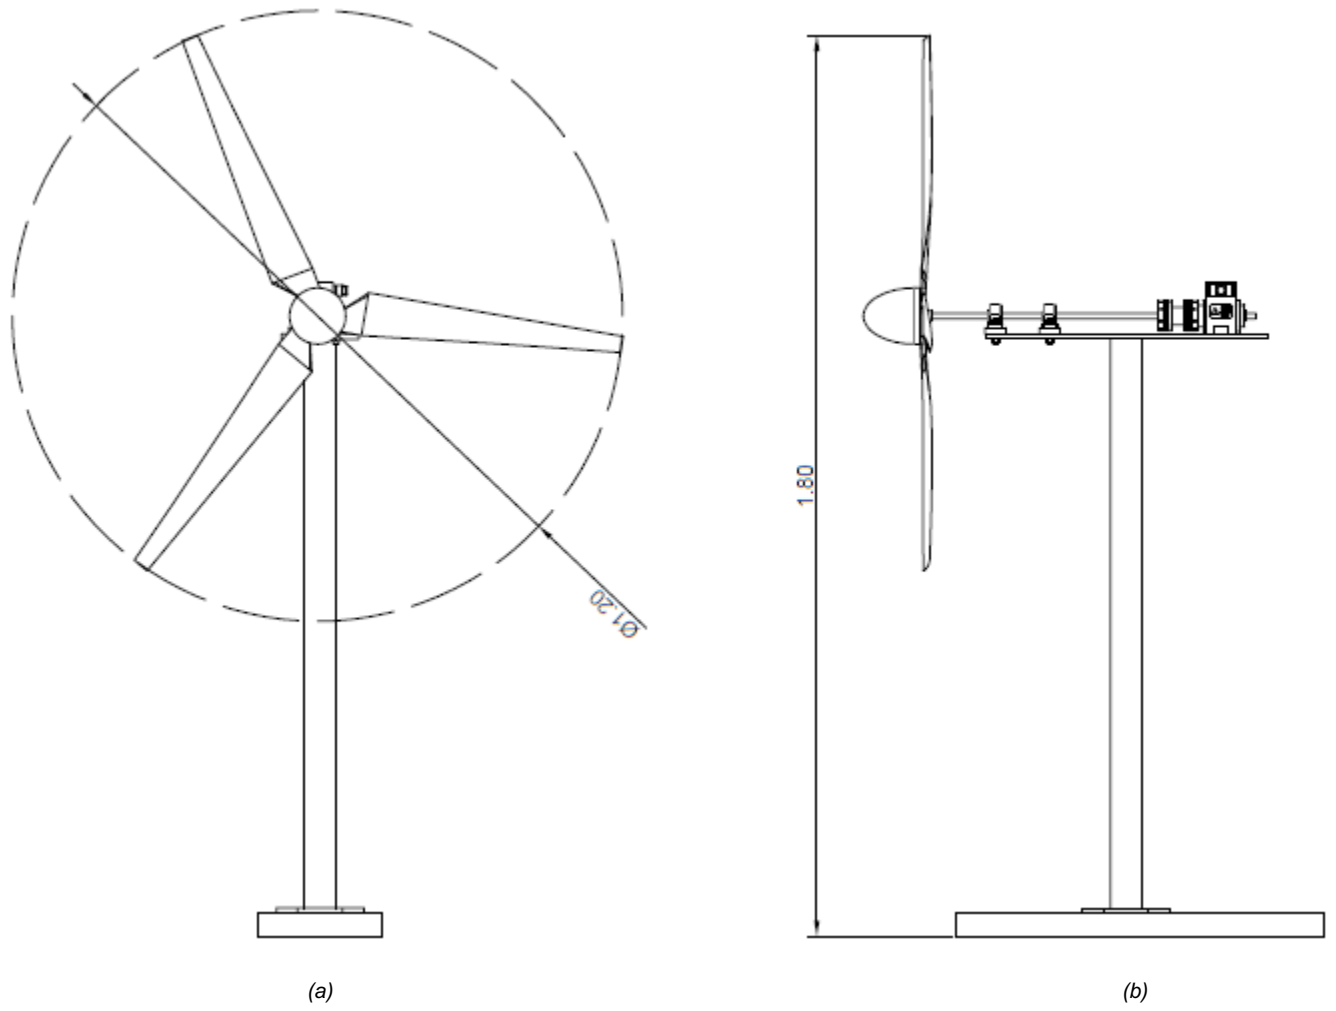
Wind turbine assembly (a) Frontal view (b) Side view
